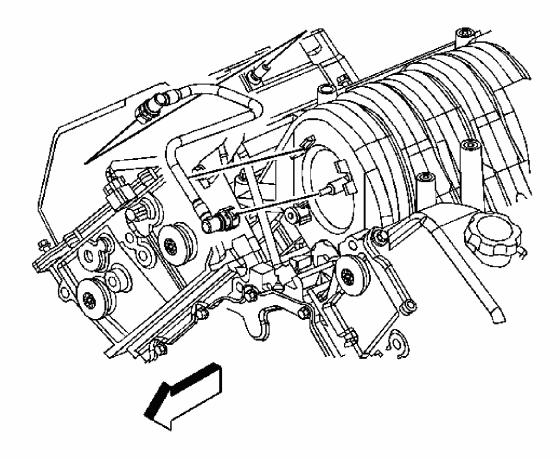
Identifying PCV Foul Air Tube Quick Connect Fitting Courtesy of GENERAL MOTORS CORP.
